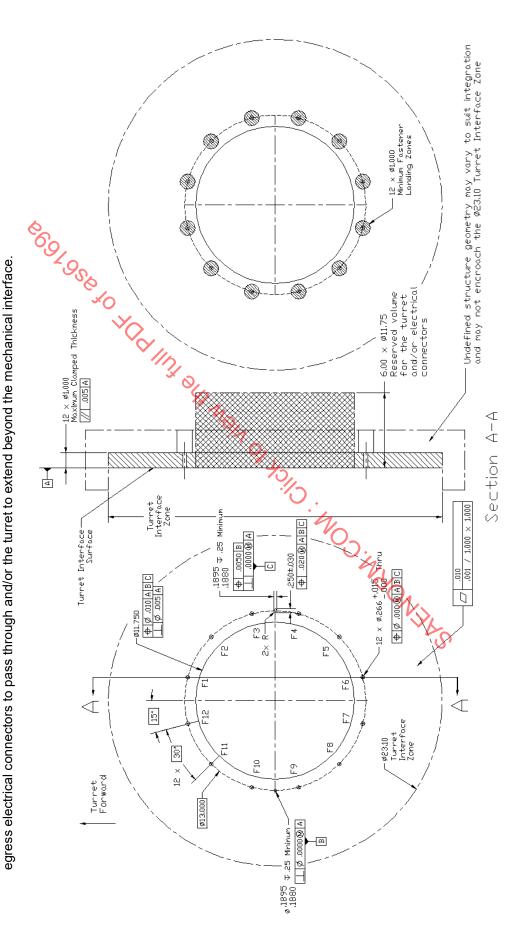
PLATFORM INTERFACE FOR TURRET CLASS I, WITH ACCESS HOLE
